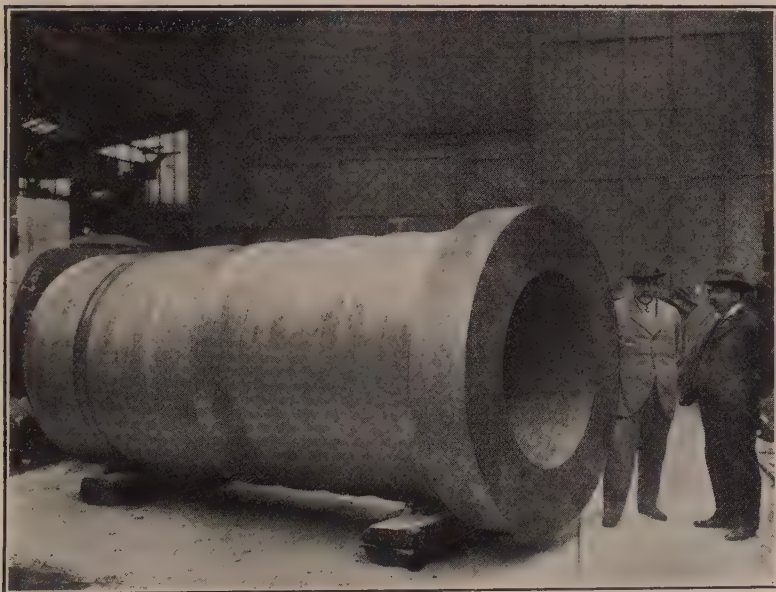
A Forged and Expanded Hydraulic Cylinder after Rough Machining.
